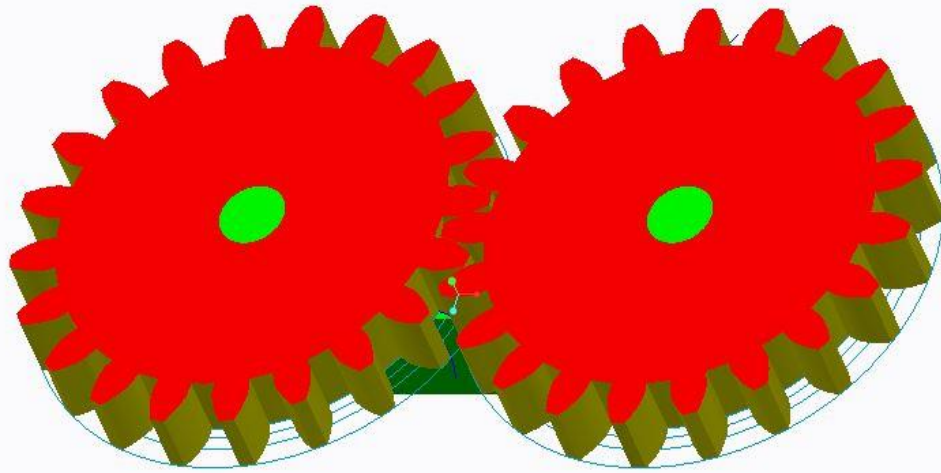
CAD model: Spur Gear (Both gears: Same size)
